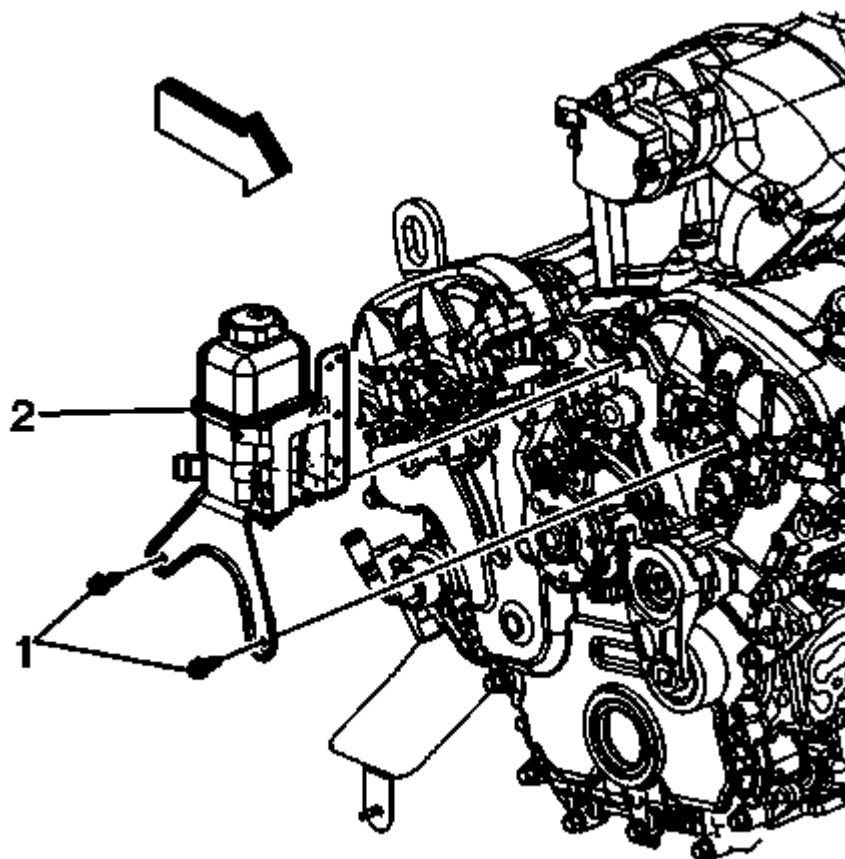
Identifying Power Steering Fluid Reservoir Bracket & Bolts
